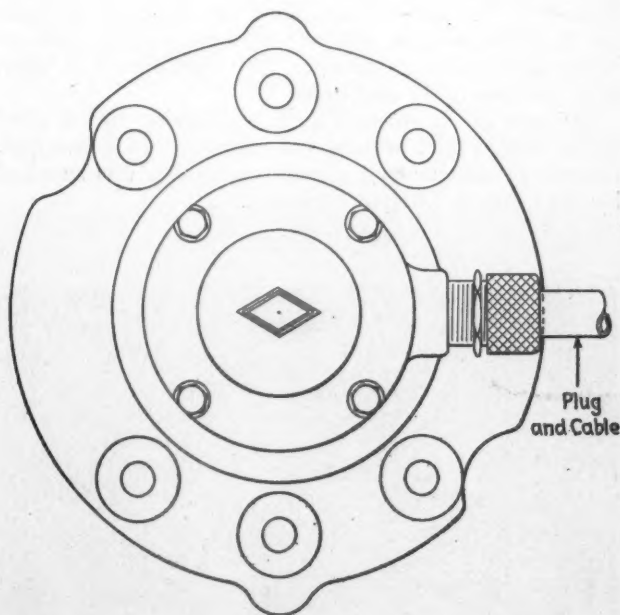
Rotary switch designed for standard mounting on roller journals at one end of each axle
